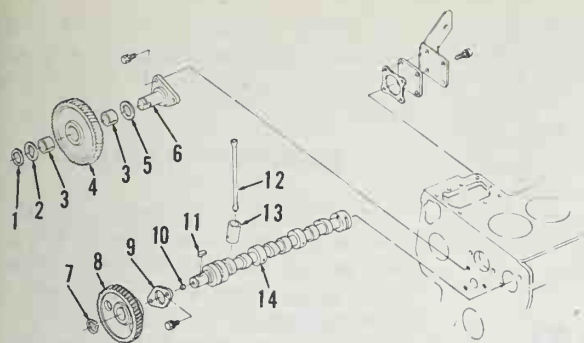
Exploded view of camshaft and idler gear assemblies.
